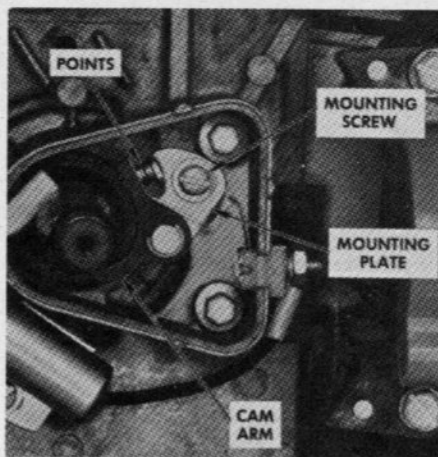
View of typical breaker box and breaker point assembly after flywheel and breaker box cover are removed.
